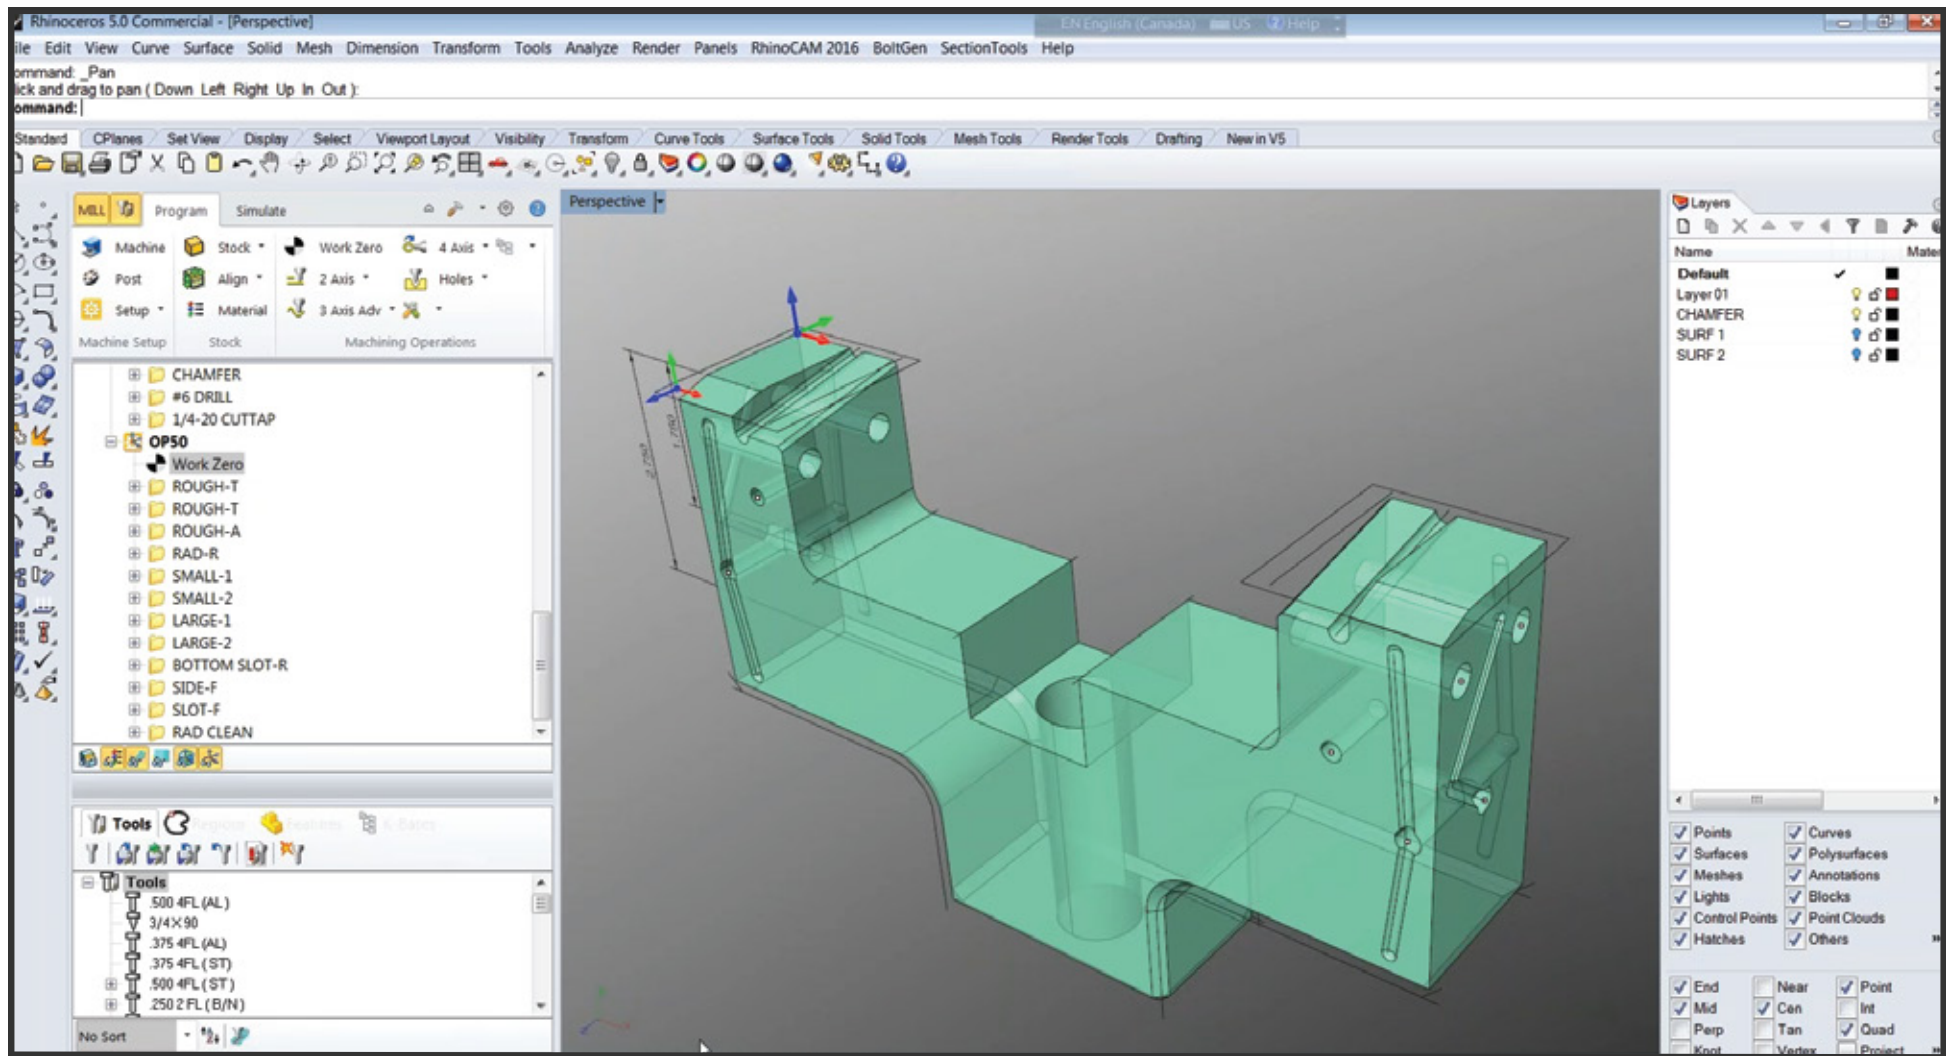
Sample Tool & Die part machined at T-FAY TECH from A2 Tool Steel. The RhinoCAM functionality is neatly composed within the Machining Browsers displayed on the left side of the Rhino 5.0 display.
